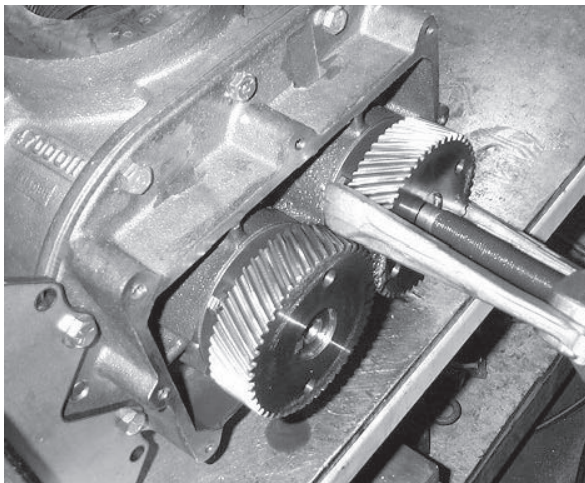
Pulling Driven Gear with Jaw Puller or Bar Puller
